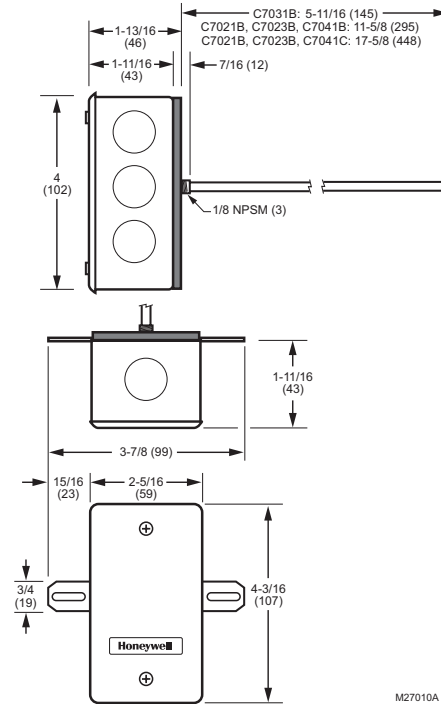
C7021B/C, C7023B/C Dimensions in Inches (mm).
